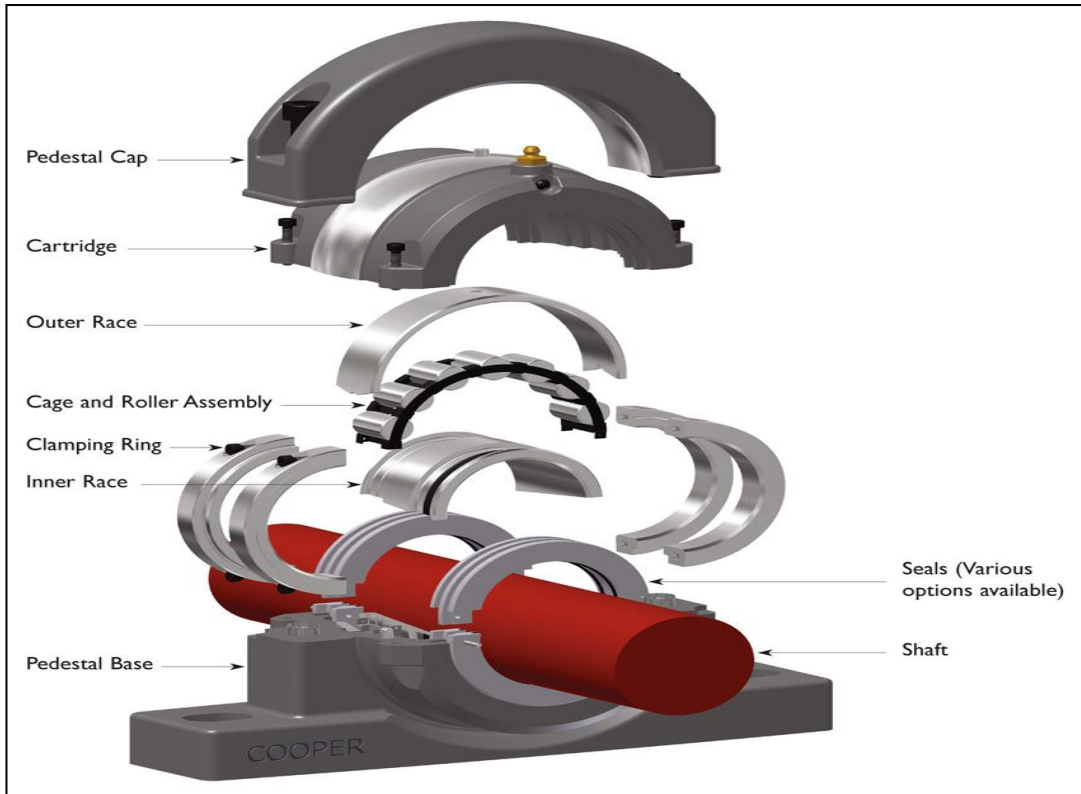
Cooper split bearing components (Cooper Bearing, 2015)
